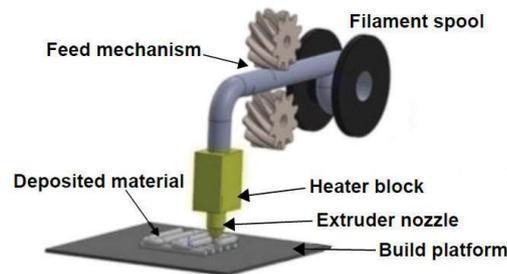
Schematic of the FDM Manufacturing Technique [10]
